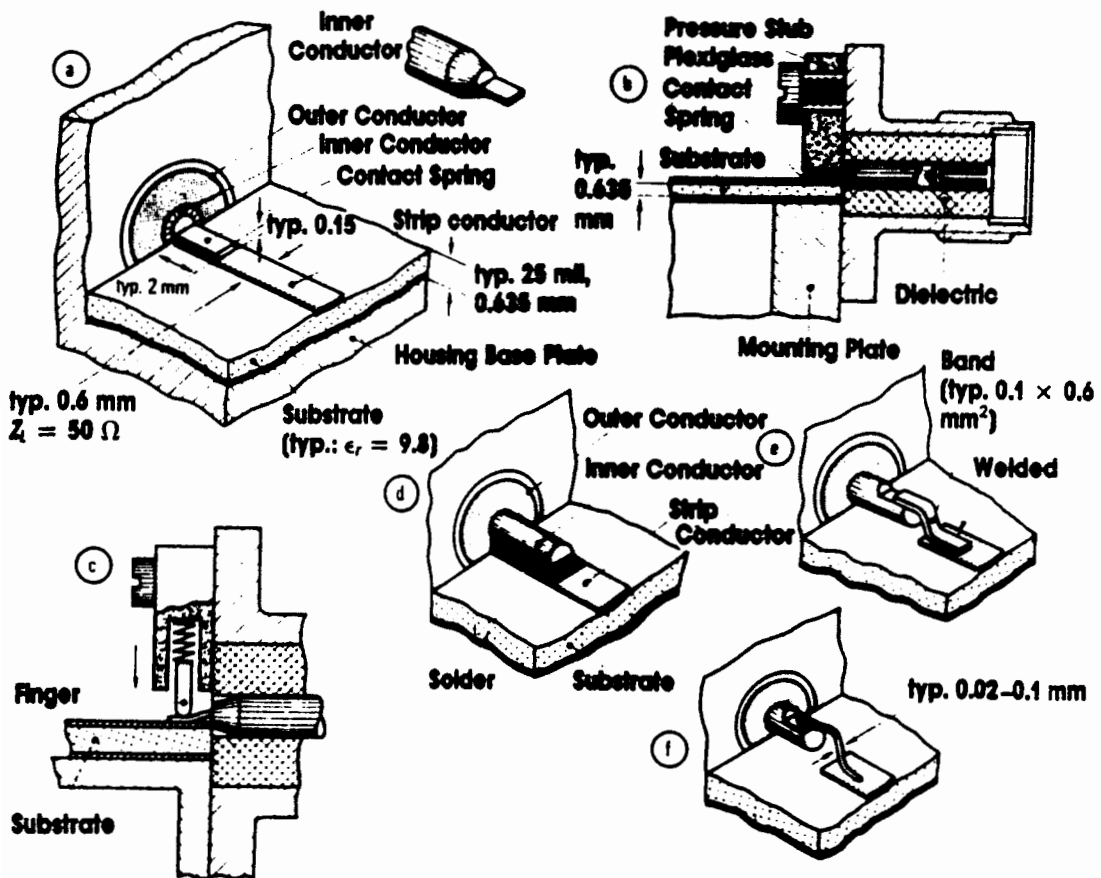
Possibilities for inner-conductor connectors: (a) gluing with spring; ( $f \leq 18 \text{ GHz}$ ); (b) as in (a), but with plastic pressure stub; (c) as in (a), but with spring-loaded finger; (d) soldered inner conductor ( $f \leq 1 \text{ GHz}$ ); (e) welded strip ( $f \leq 0.5 \text{ GHz}$ ); (f) welded wire ( $f \leq 0.2 \text{ GHz}$ ).
